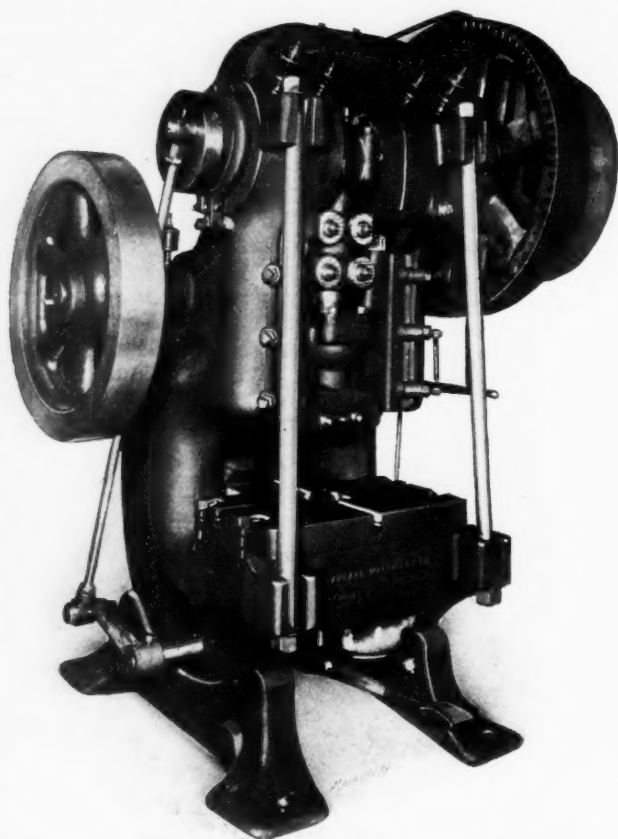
Front View of Standard No. 6-B Back-gear Power Press
